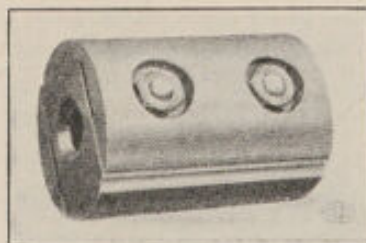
Cylindrical or "Safety" Cutter Block for Spindle Moulder.
